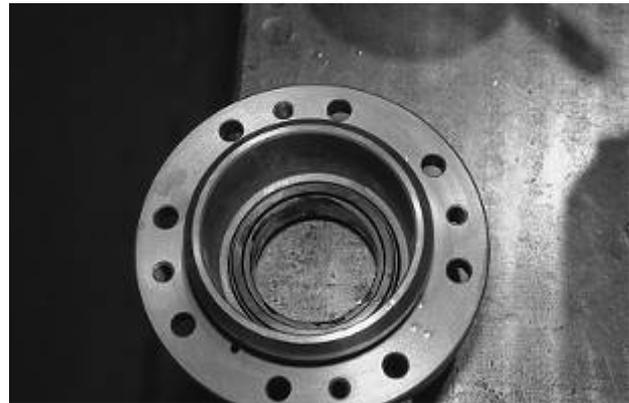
Details of BBSE Type Mechanical Seal Assembly
